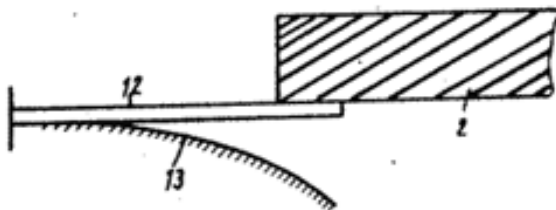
Machine mounting on non-linear flexible shock absorbers.
